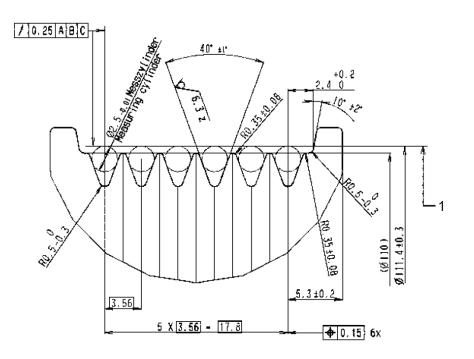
Detail U – refrigerant compressor drive pulley, pulley diameter 110 mm
